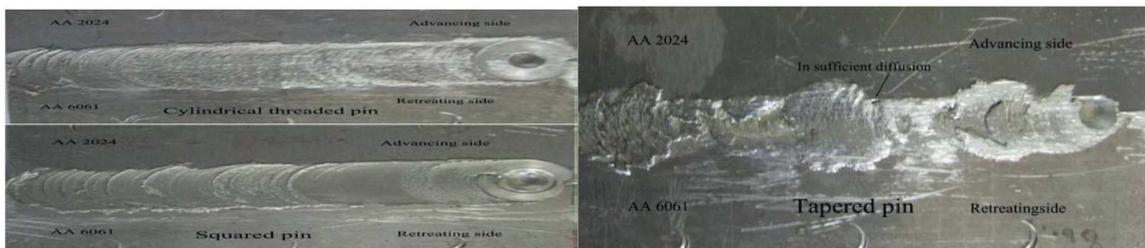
, Surface morphologies of weld, a- without defects, b- with defects. [6]
